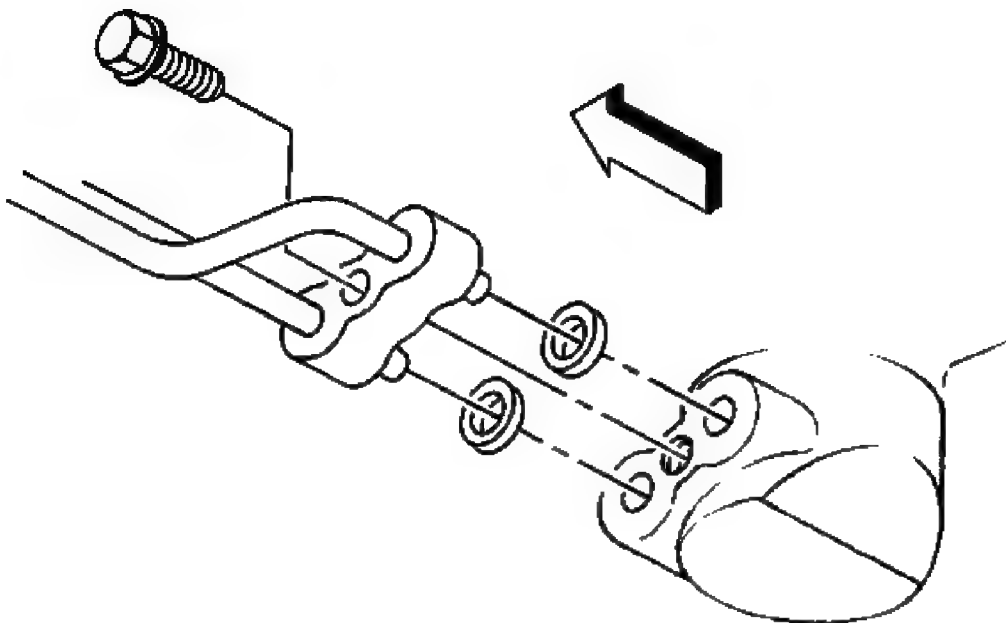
View Of Remote Oil Filter Inlet & Outlet Hoses To Remote Oil Filter Pipe Adapter
